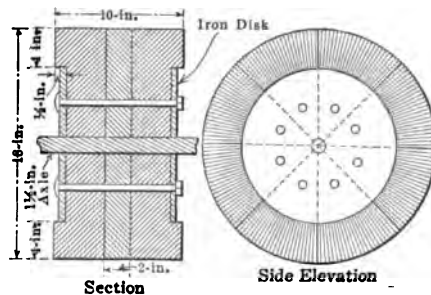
IDLER FOR SKIP ROPE IN SHAFTS.
